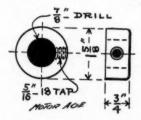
Bell Crank Lever Shaft Collar. 2—Steel,
